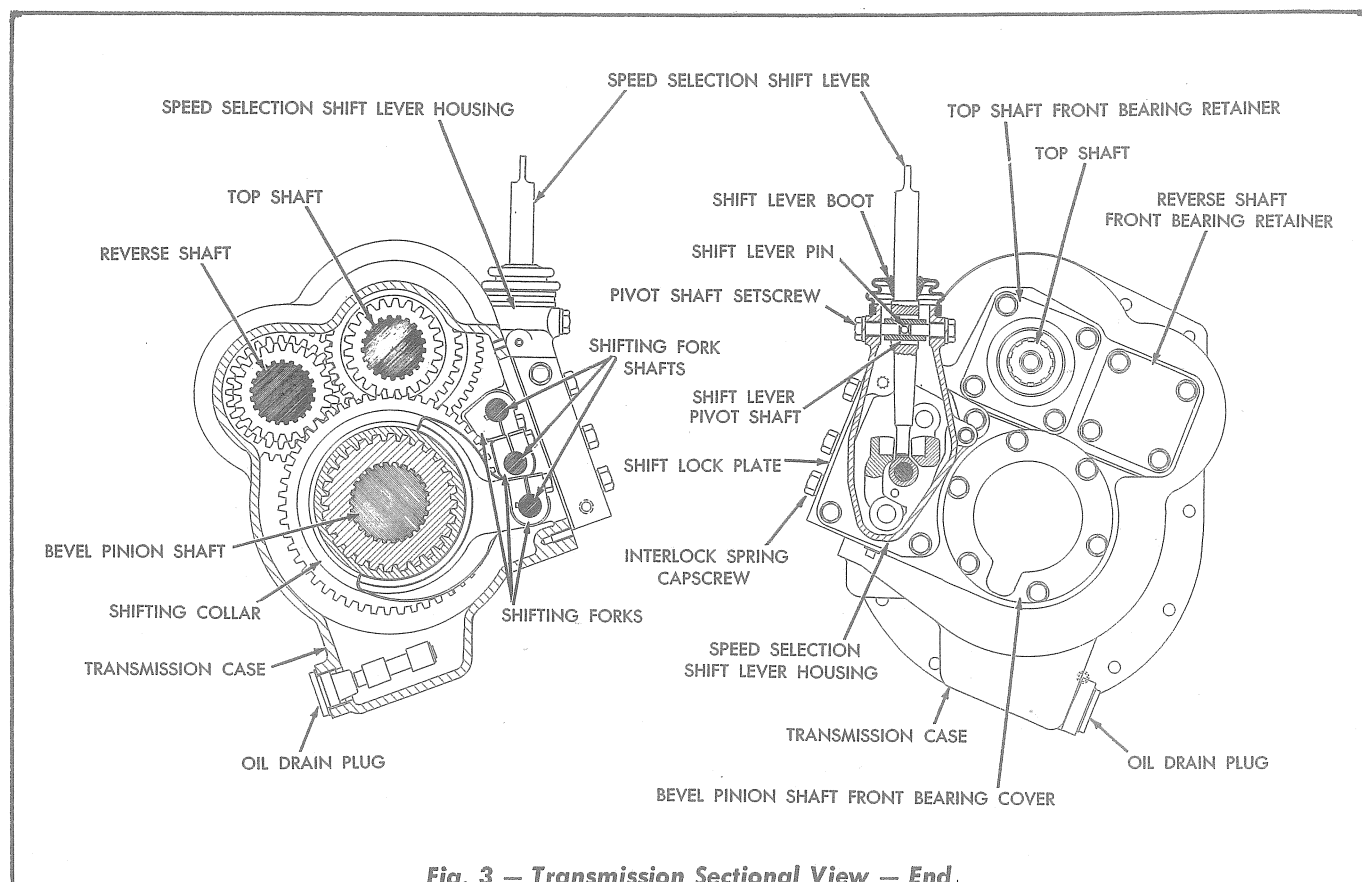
Transmission Sectional View — End View (Tractors with Torque Converter)
